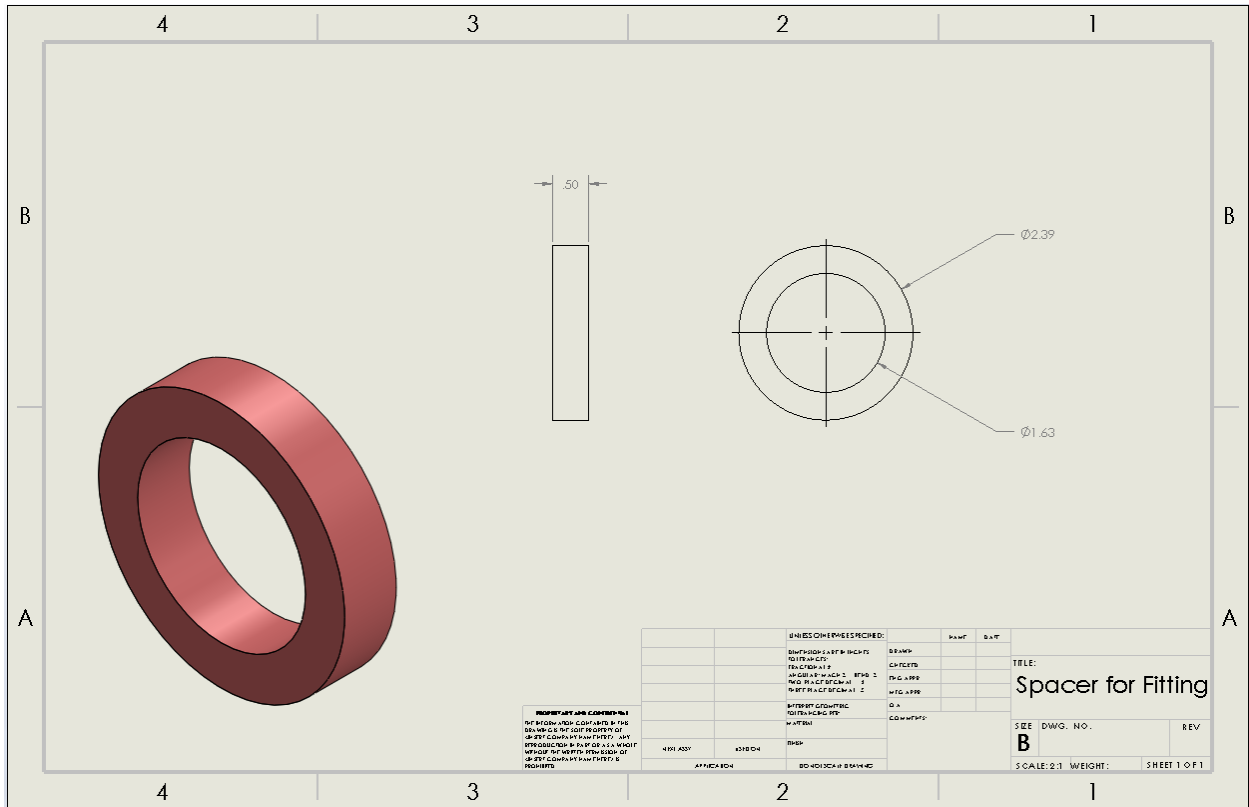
Spacer for Shaft Bearing in Two-Inch PVC Fitting Engineering Drawing
